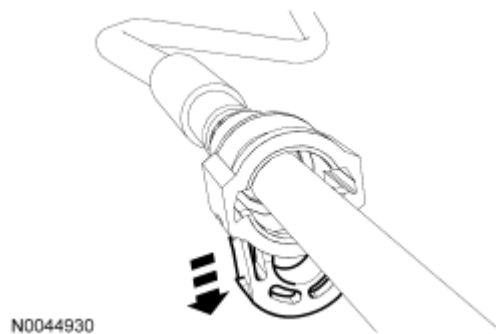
Pushing Locking Mechanism Outward To Releasing Tube
